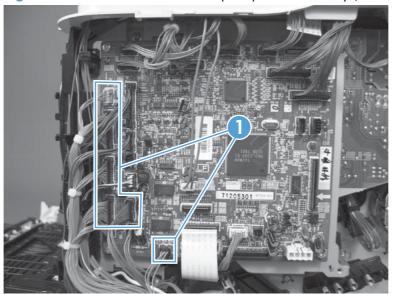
Remove the cassette pickup drive assembly (2 of 10)
